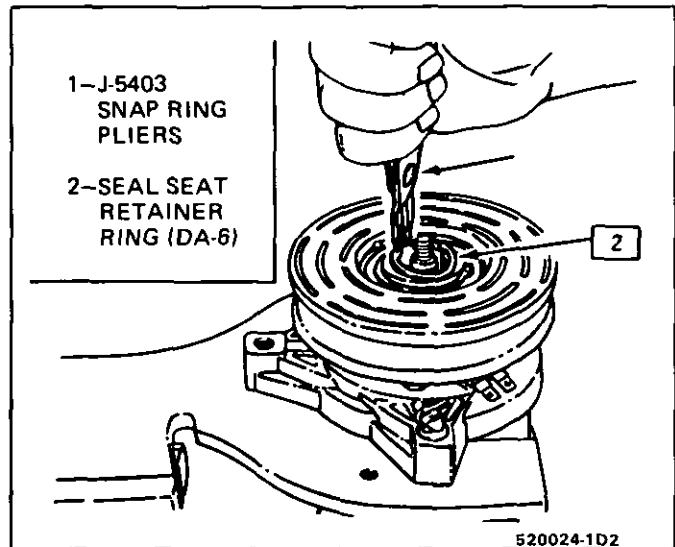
Removing or Installing Shaft Seal Seat Retaining Ring
